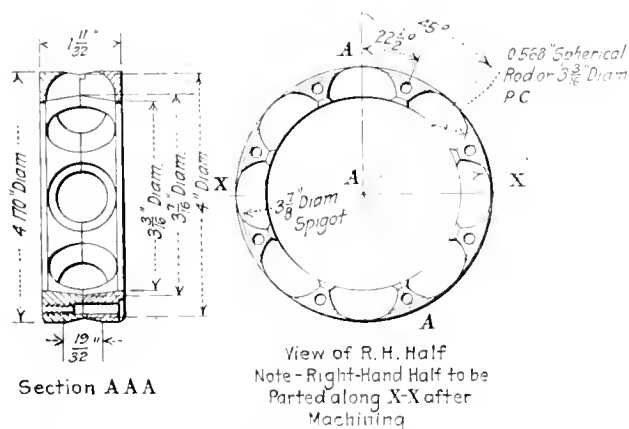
LOCATED CAGE FOR BALL BEARINGS
